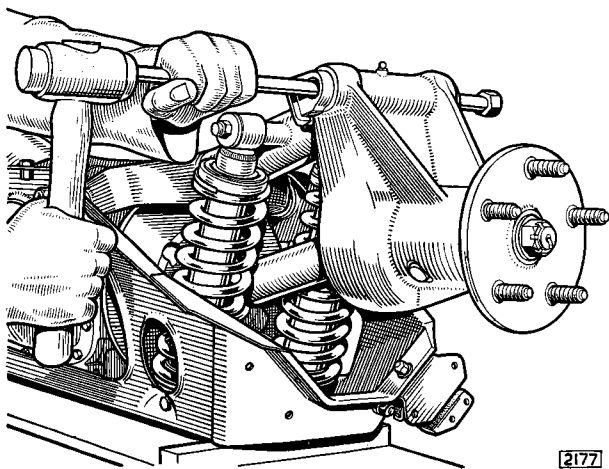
Drifting out the wishbone outer fulcrum shaft
